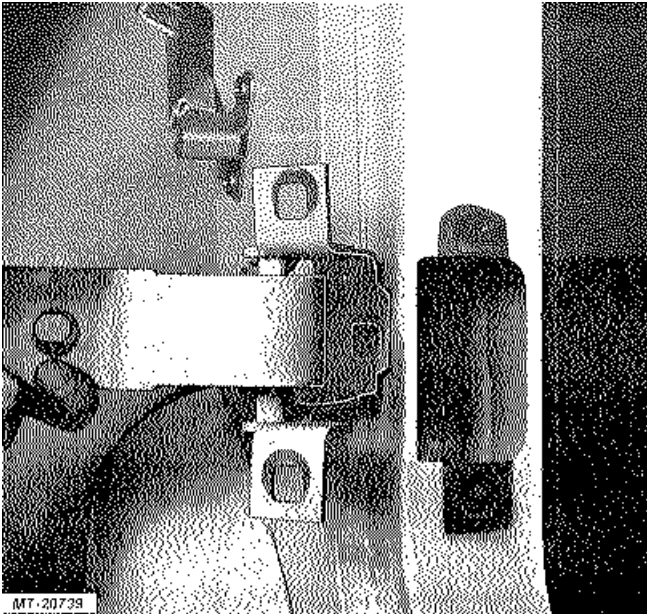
Removing Cab Door Hinge From Hinge Pillar
